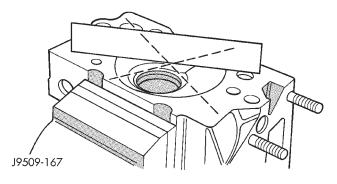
Checking Cylinder Head Flatness ROCKER ARMS AND PUSH RODS
